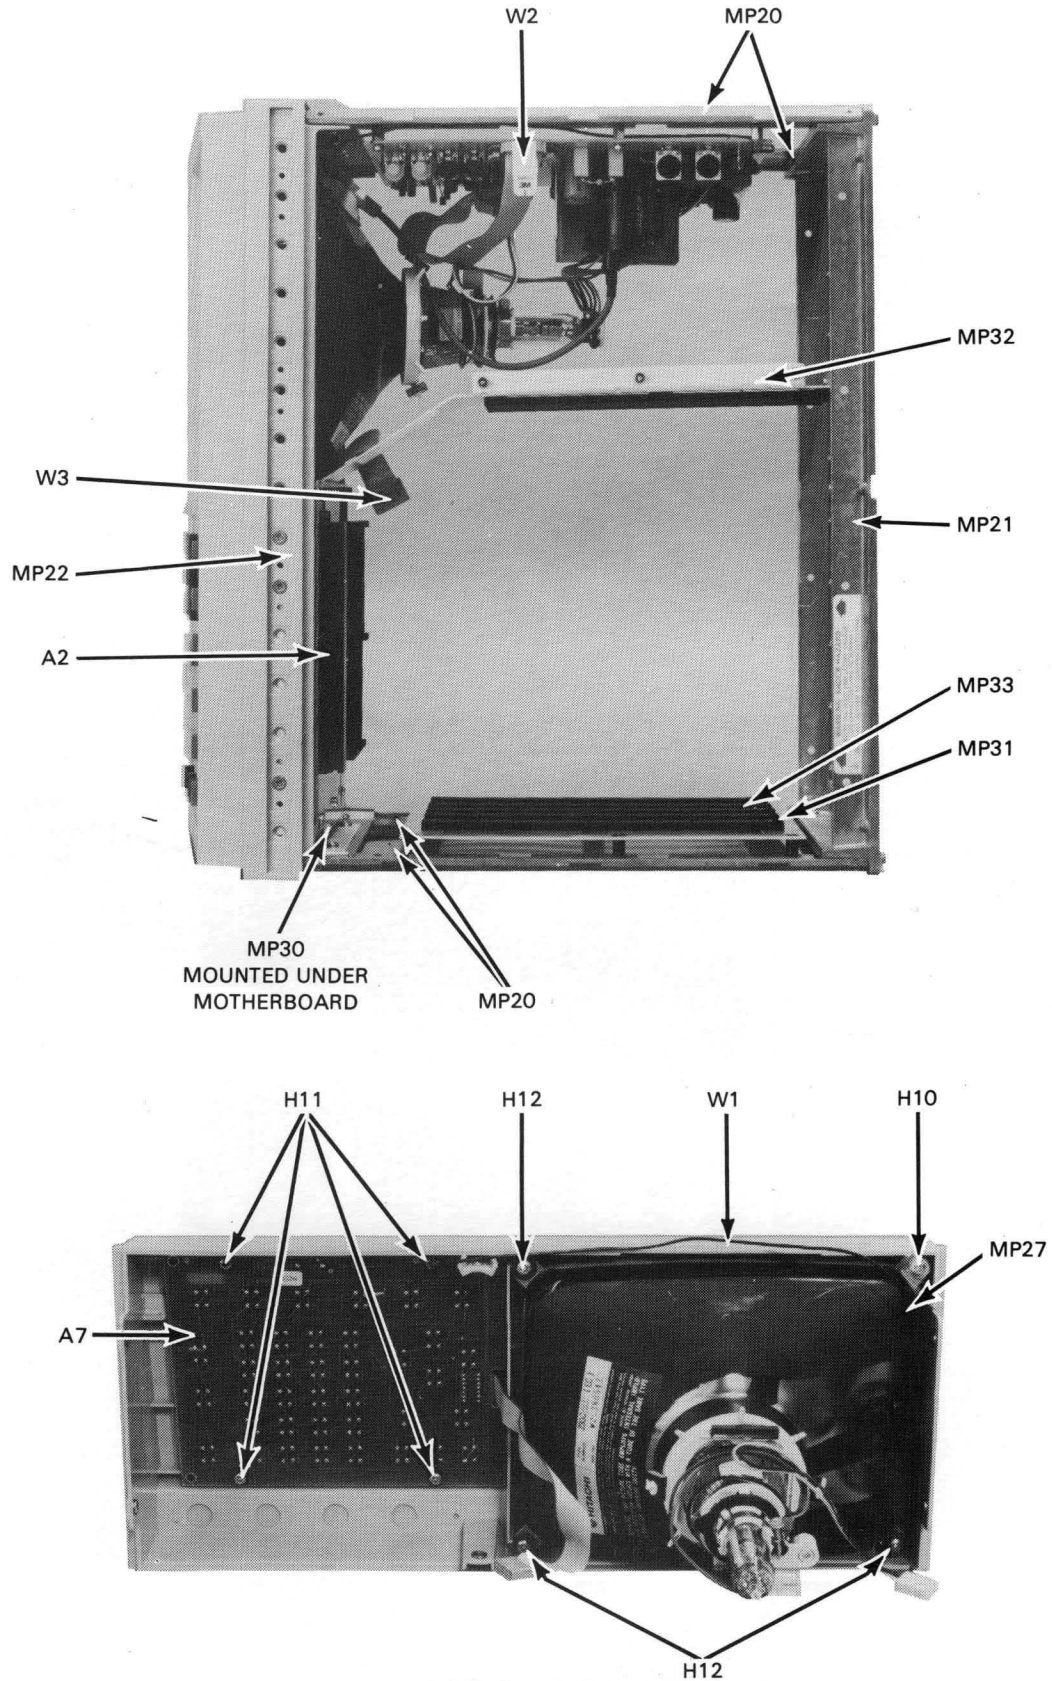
Mainframe Mechanical Parts Locations (sheet 4 of 4)
